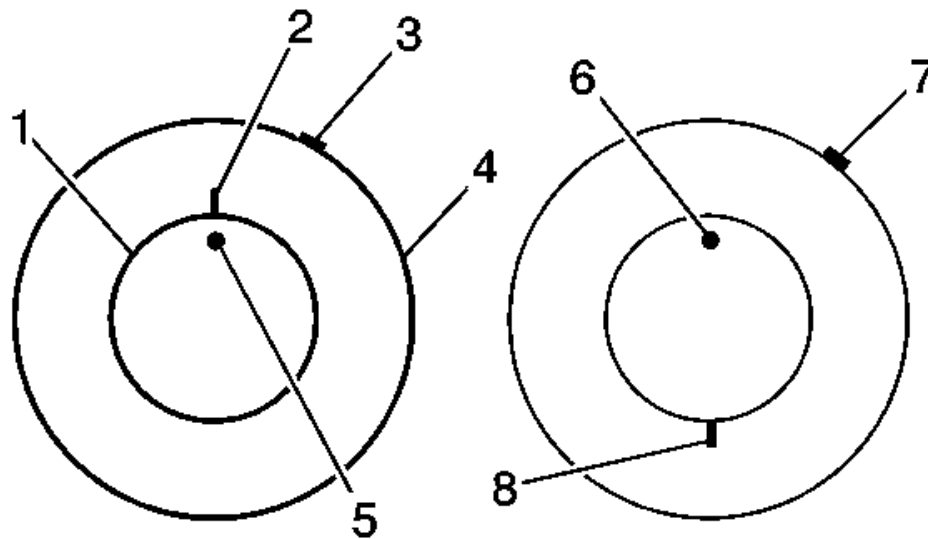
View Of Tire-to-Wheel Match-Mounting
